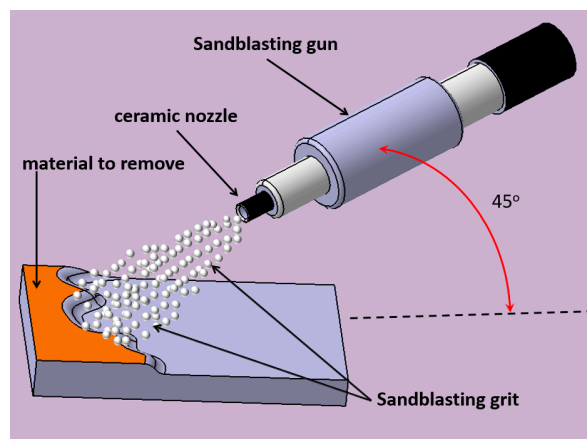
Schematic drawing of the sandblasting process used for S235JR steel samples.
